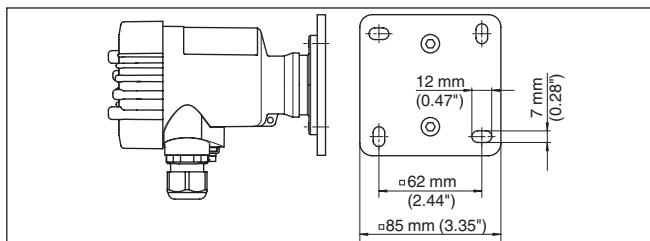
VEGADIS 62 for wall mounting, bottom view of mounting plate.
